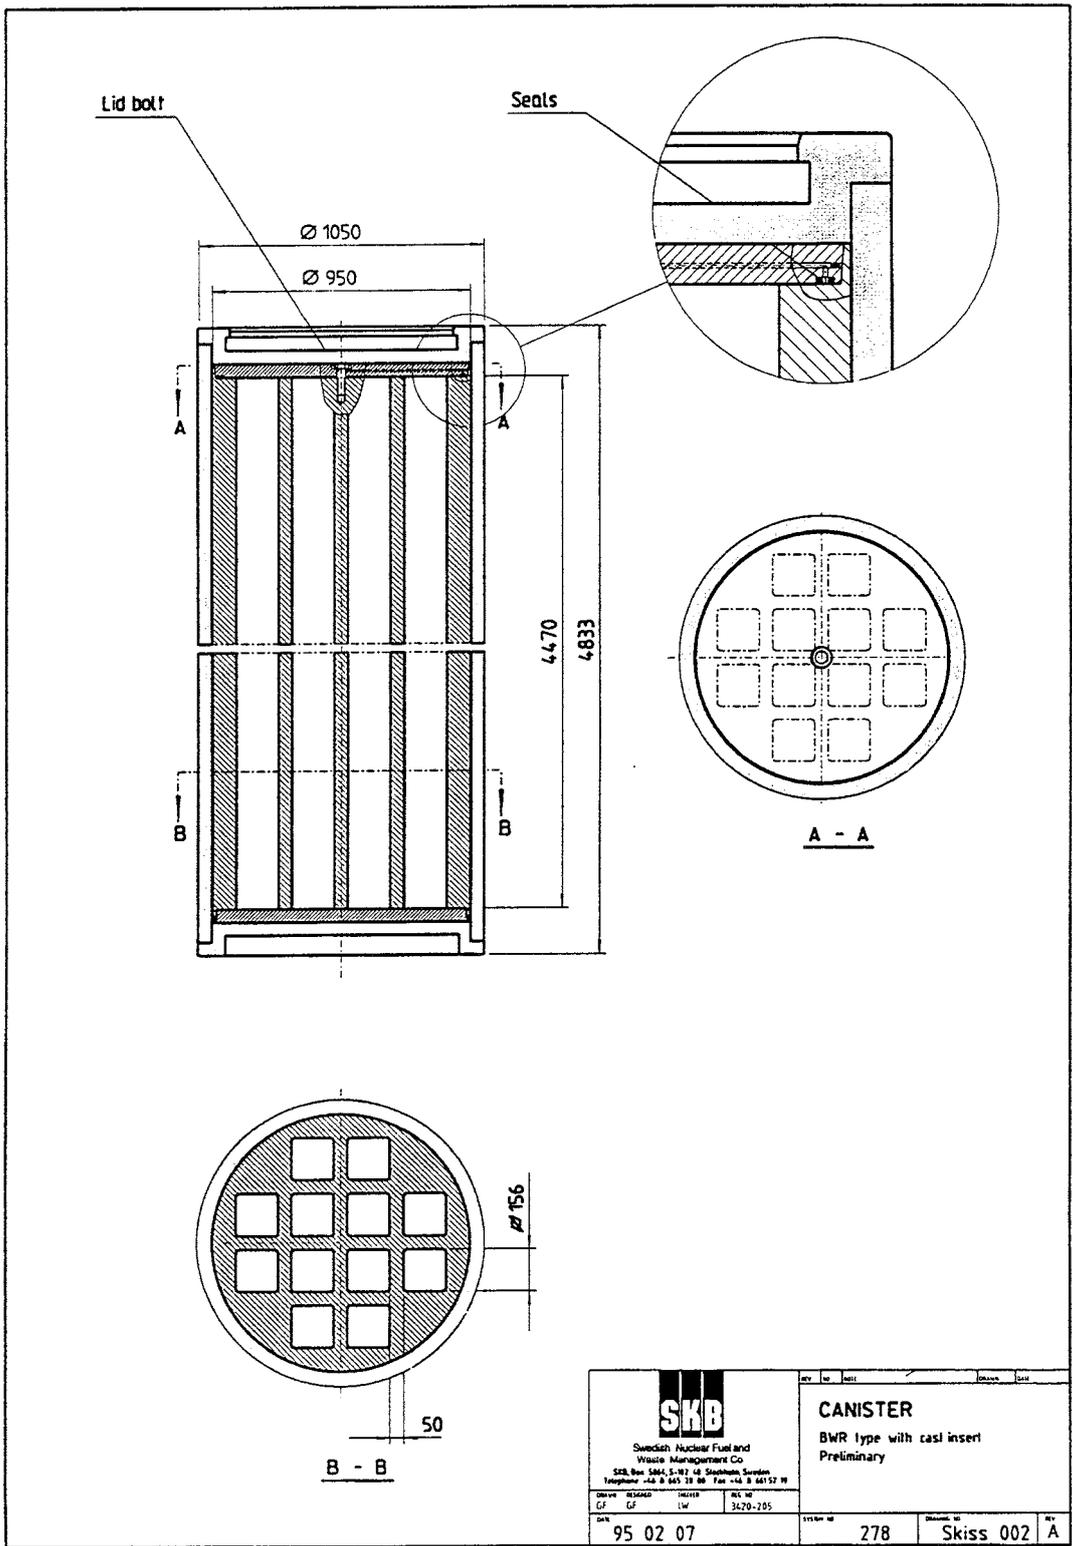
Dimensional drawing of canister for spent nuclear fuel. Version for 12 BWR assemblies.
